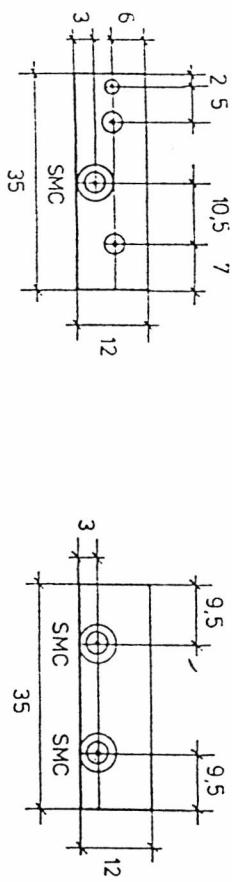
Dimensioned sketch of the end panels of DLIRQ 023
